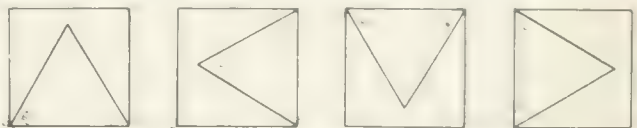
SKETCH SHOWING HOW HOLES ARE DRILLED
